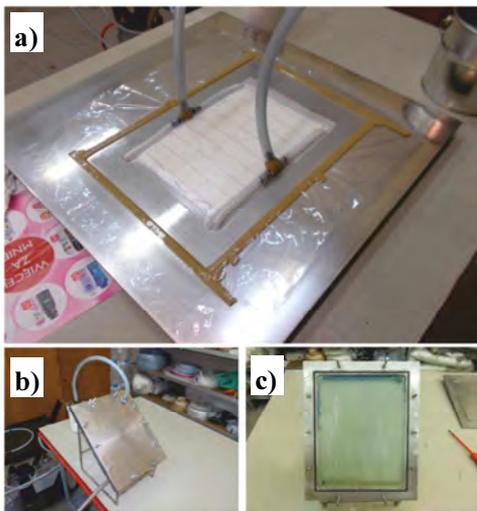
Manufacturing processes: a) preform ready for VARI process, b) assembled mould during RTM process, c) impregnated and cured panel after RTM process
